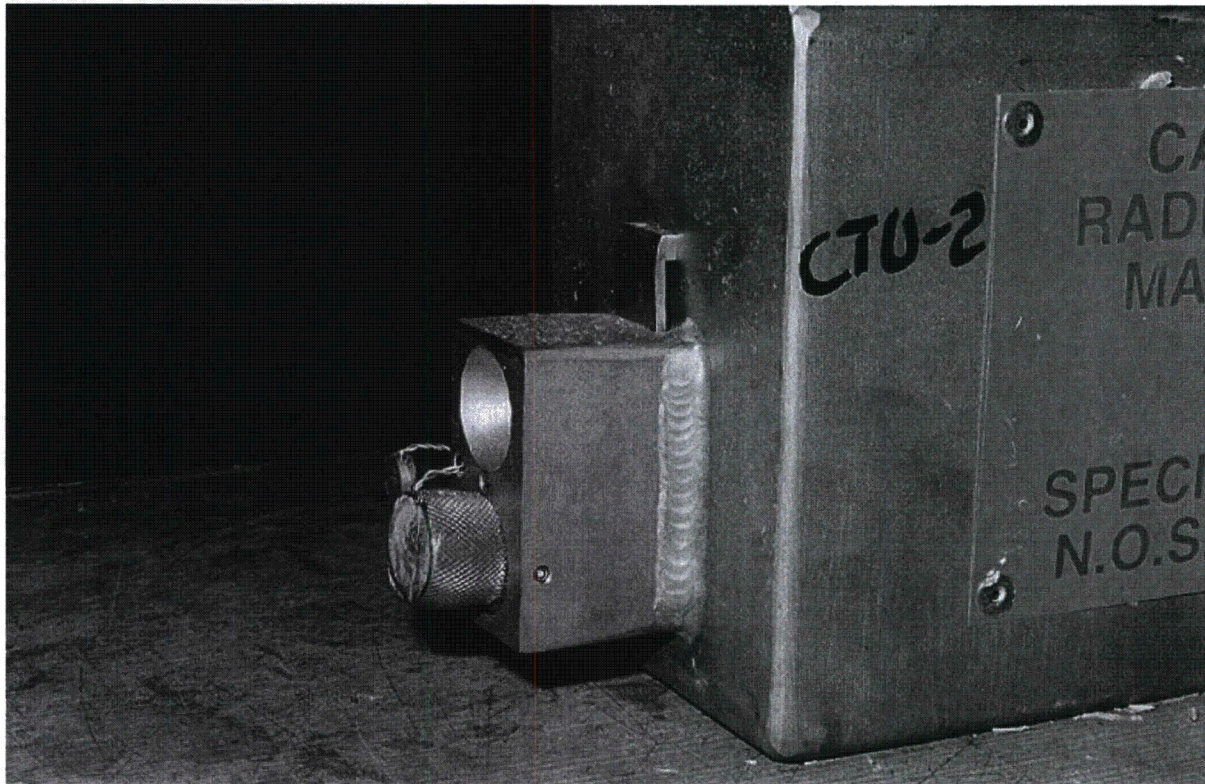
CTU-2 Post-Test Disassembly: Jammed Lock Box Dust Cap & Indicator
